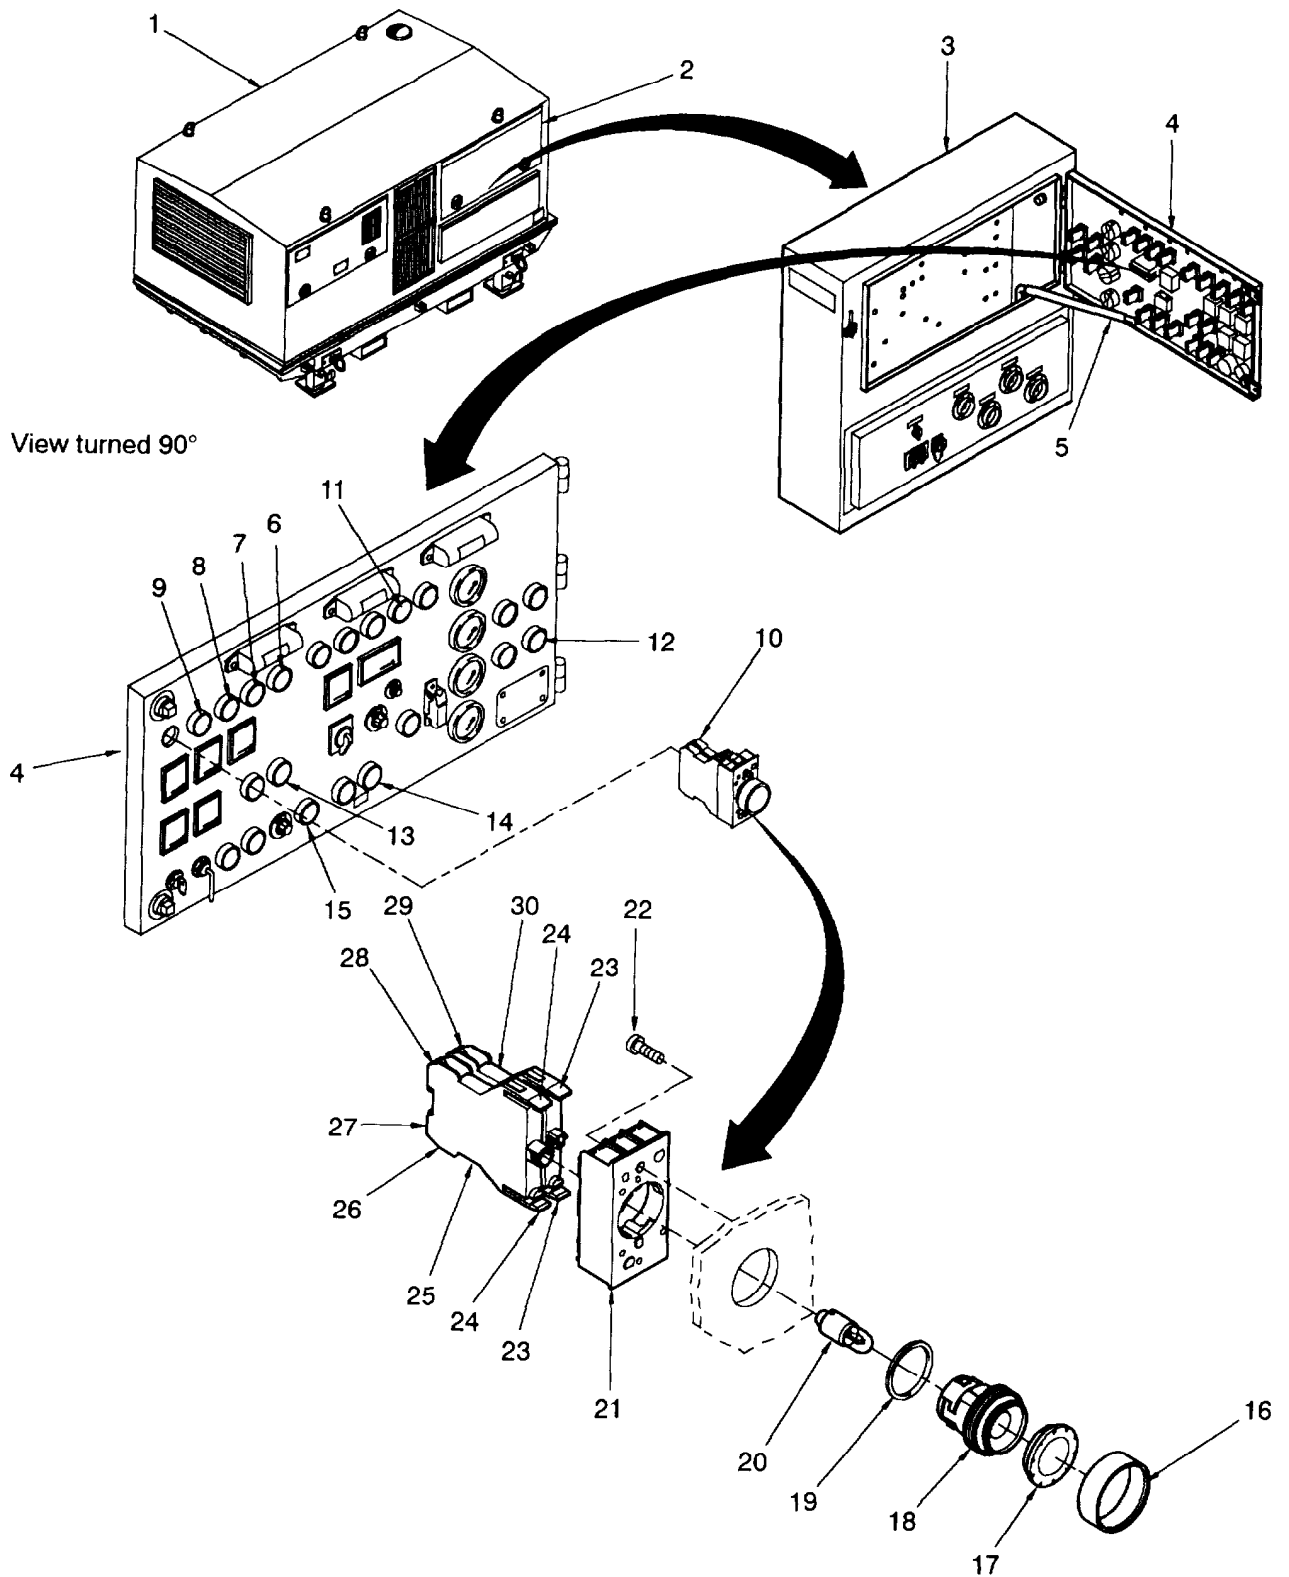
Control Cabinet Assembly, Pushbutton Switch and Indicator Assembly Maintenance.
